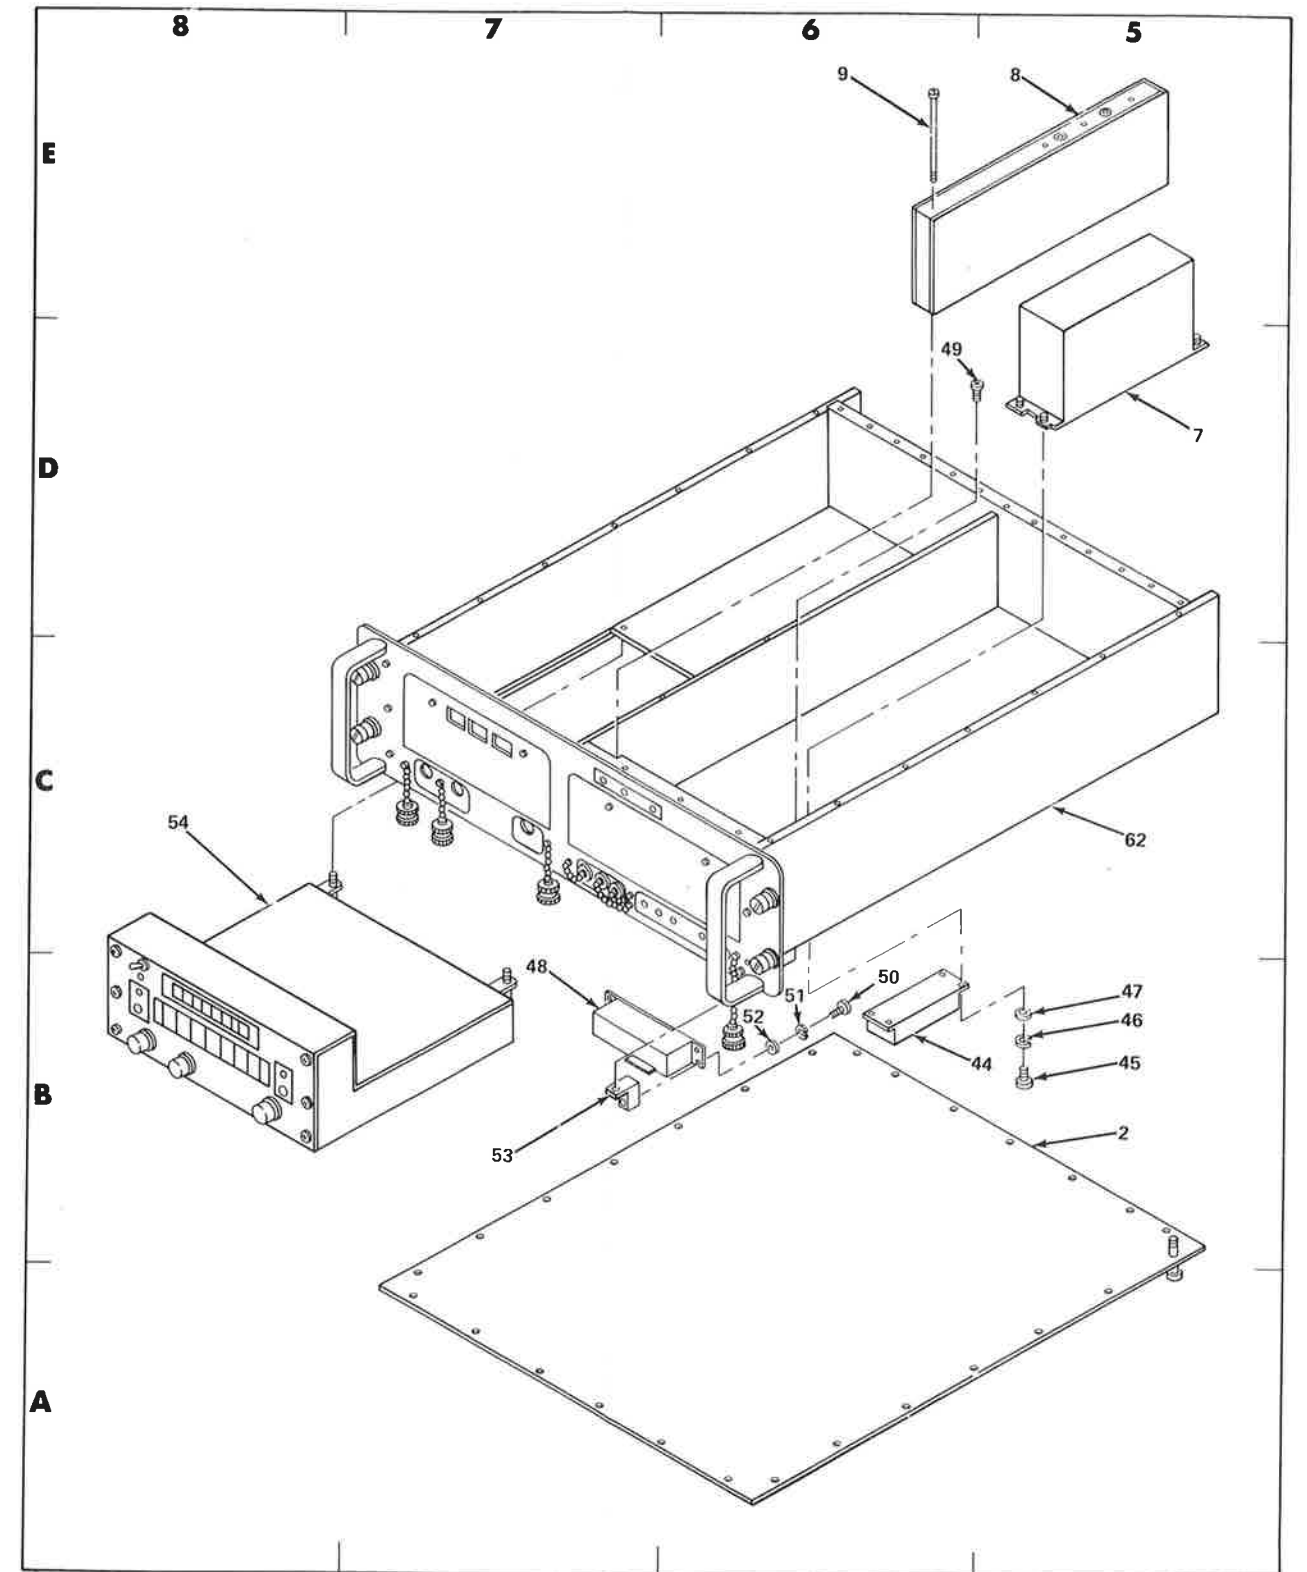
Master Regulating Clock 0-1824/U, Exploded View Diagram (Sheet 1 of 2)
